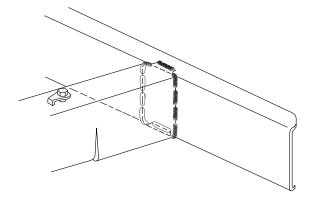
Mig Stitch Welded to Frame Rails
